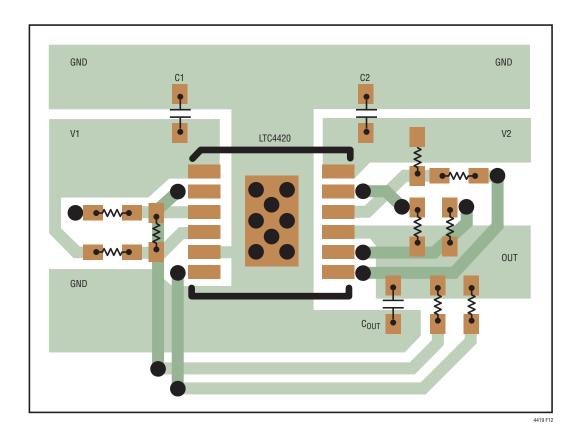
Recommended 12-Lead MSE Layout for a 2-Layer PCB
